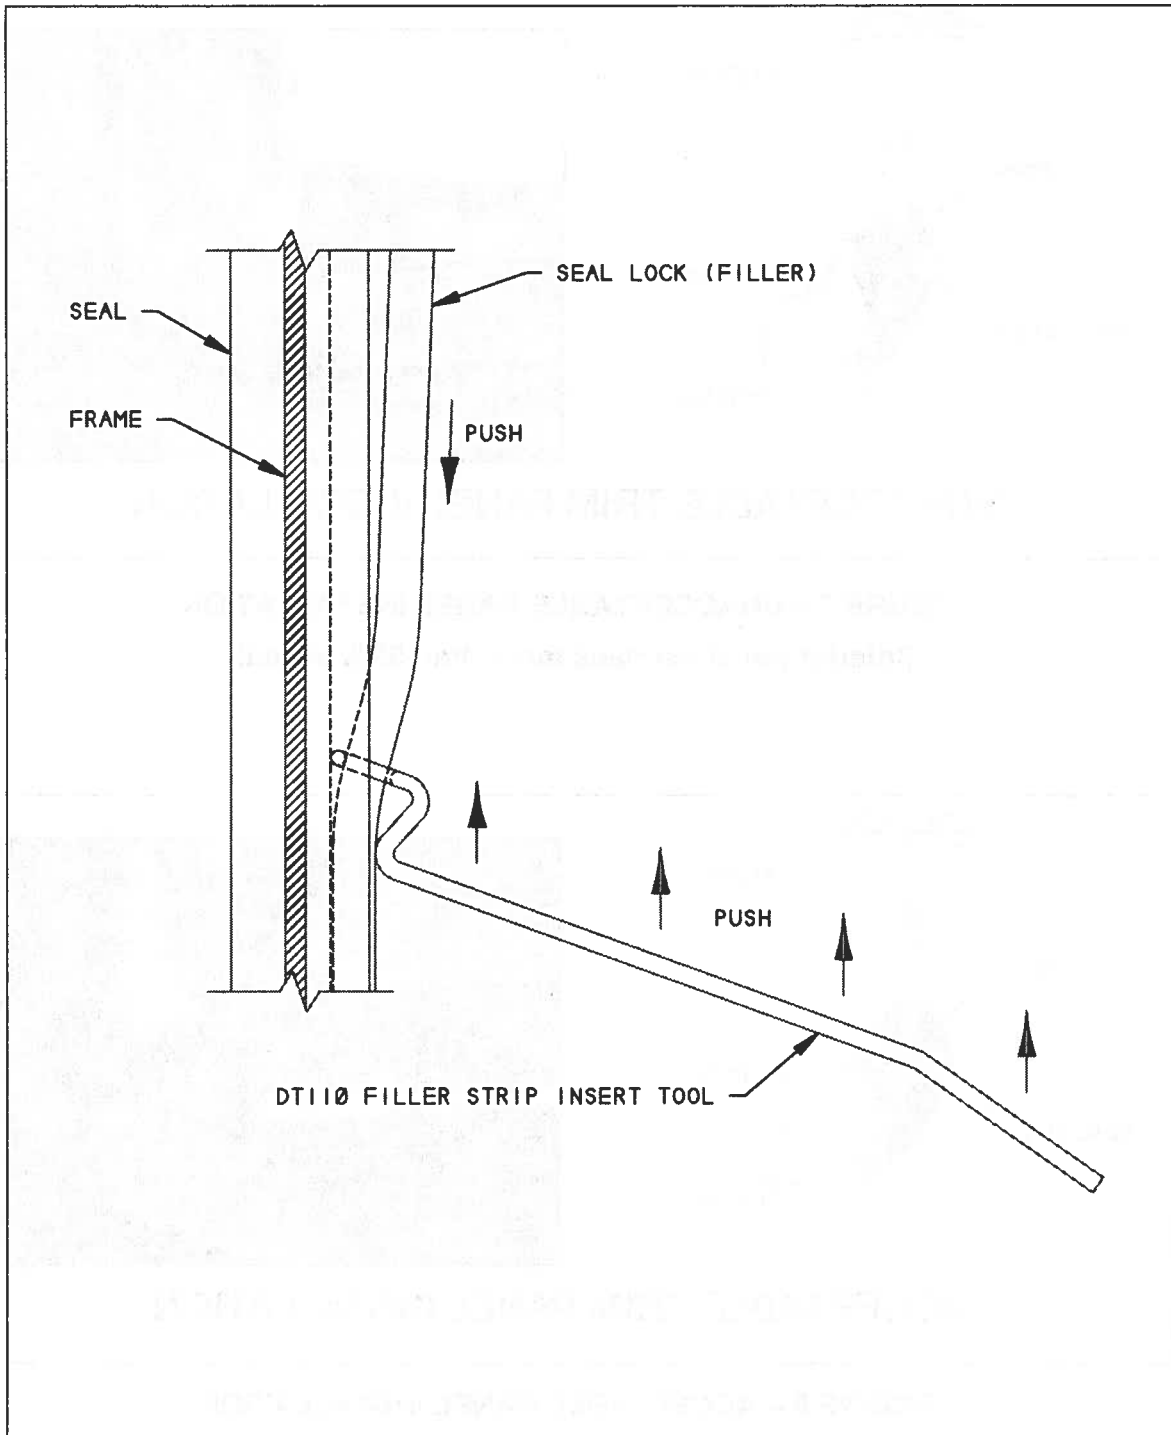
SEAL LOCK (FILLER) INSTALLATION
